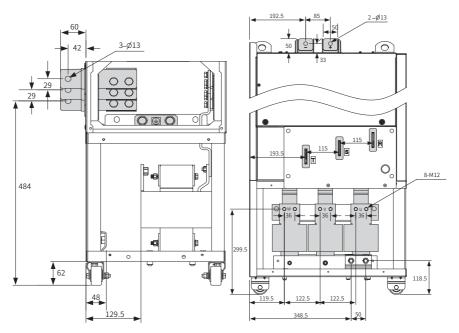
Main circuit terminal dimensions of MD880-01S-0538-4(-L)/MD880-01S-0605-4(-L) (with output reactors)
